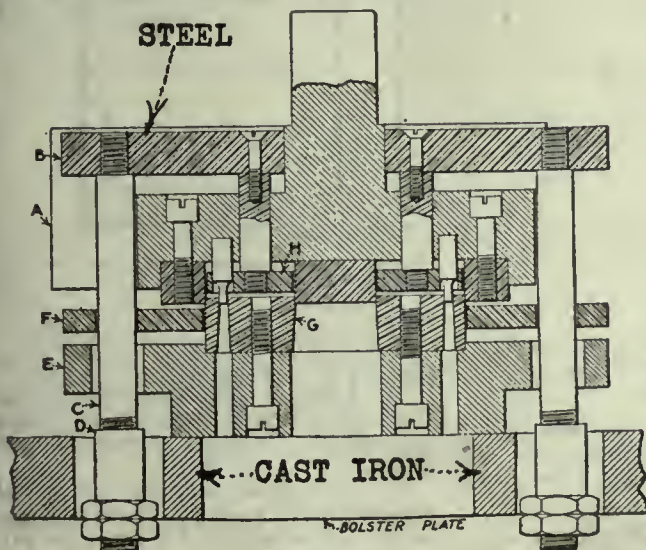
SECTIONAL VIEW OF BLANKING AND PIERCING DIE.
